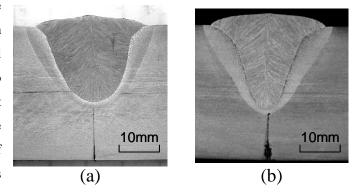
Weld bead shape manufactured under the same weld heat input
